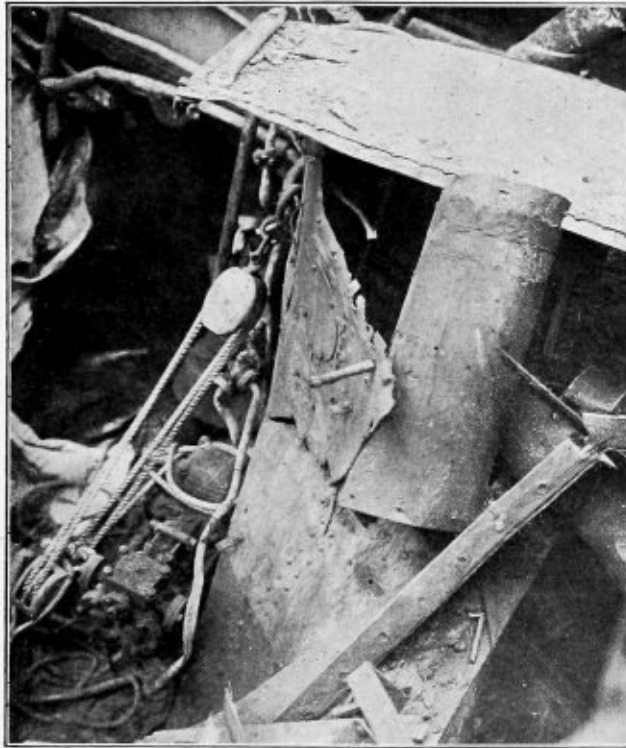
THE EXPLODED BOILER ON THE S. S. "VALDIVIA."
